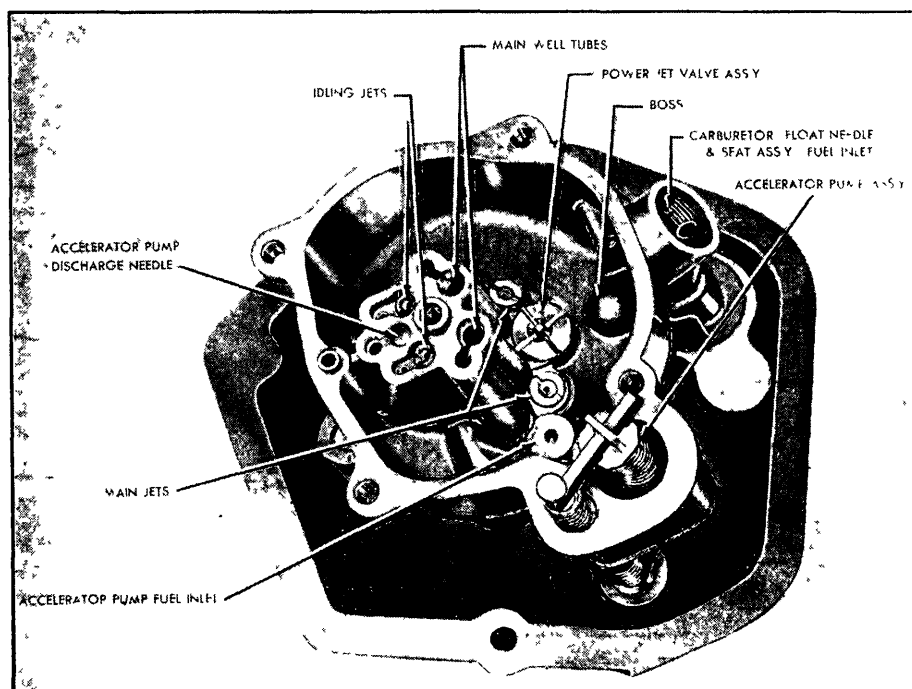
A Top view of 1949-51 Lincoln and Mercury carburetor
